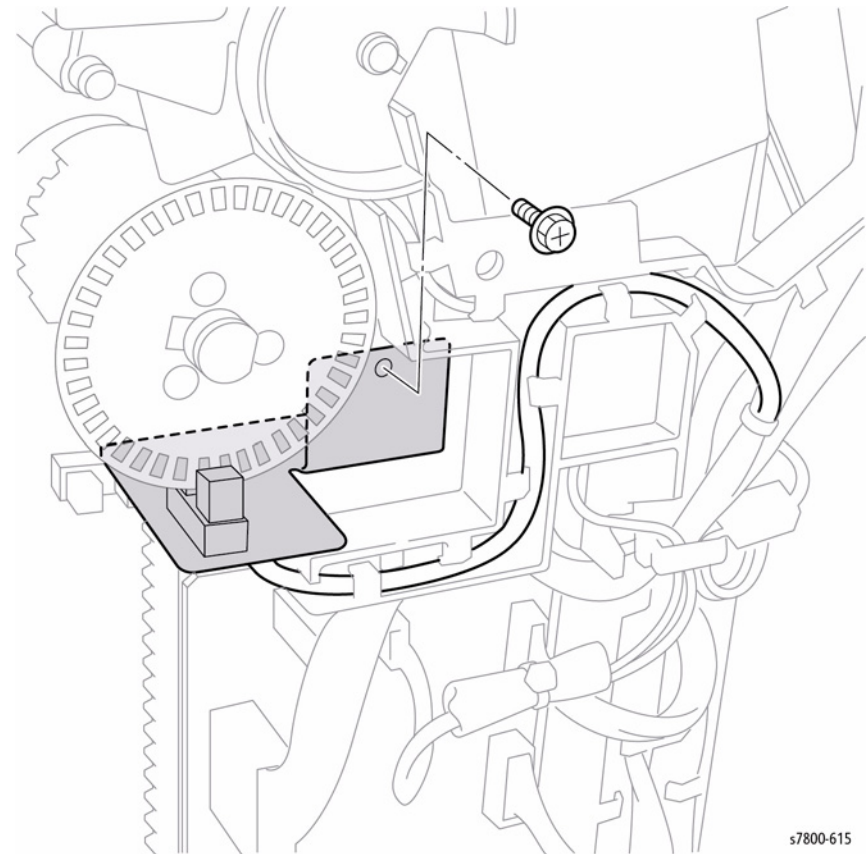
Removing the Stacker Encoder Sensor and Bracket
